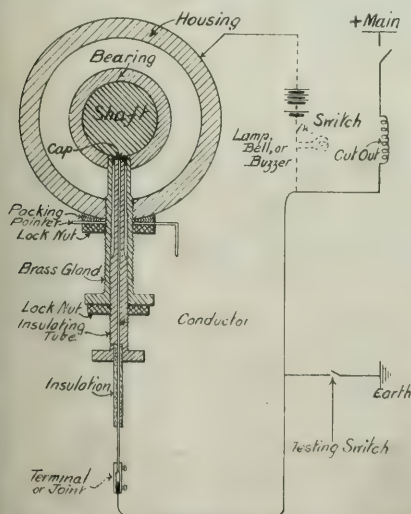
SECTION OF WORN-BEARING INDICATOR, IN POSITION.
